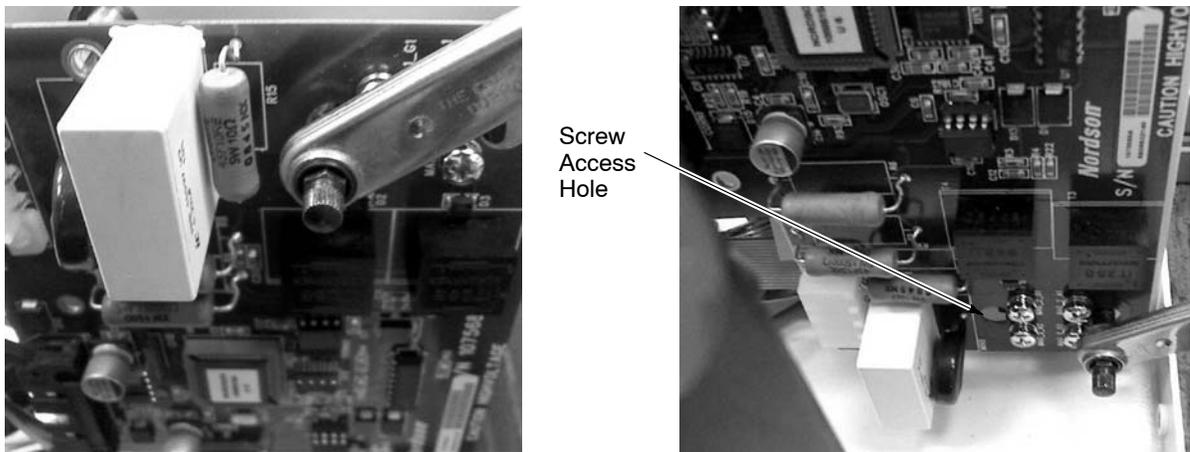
Remove four M4 Screws and Washers from the Front Side of the Phase Control Board
